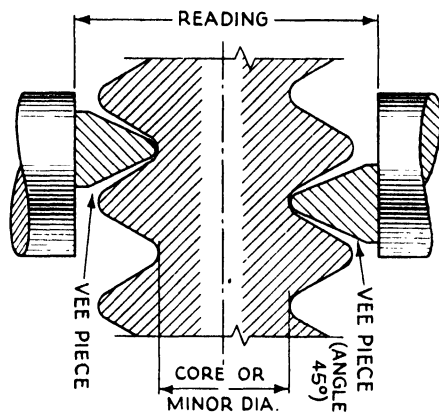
VEE PIECES USED FOR MEASUREMENT OF MINOR DIAMETER
